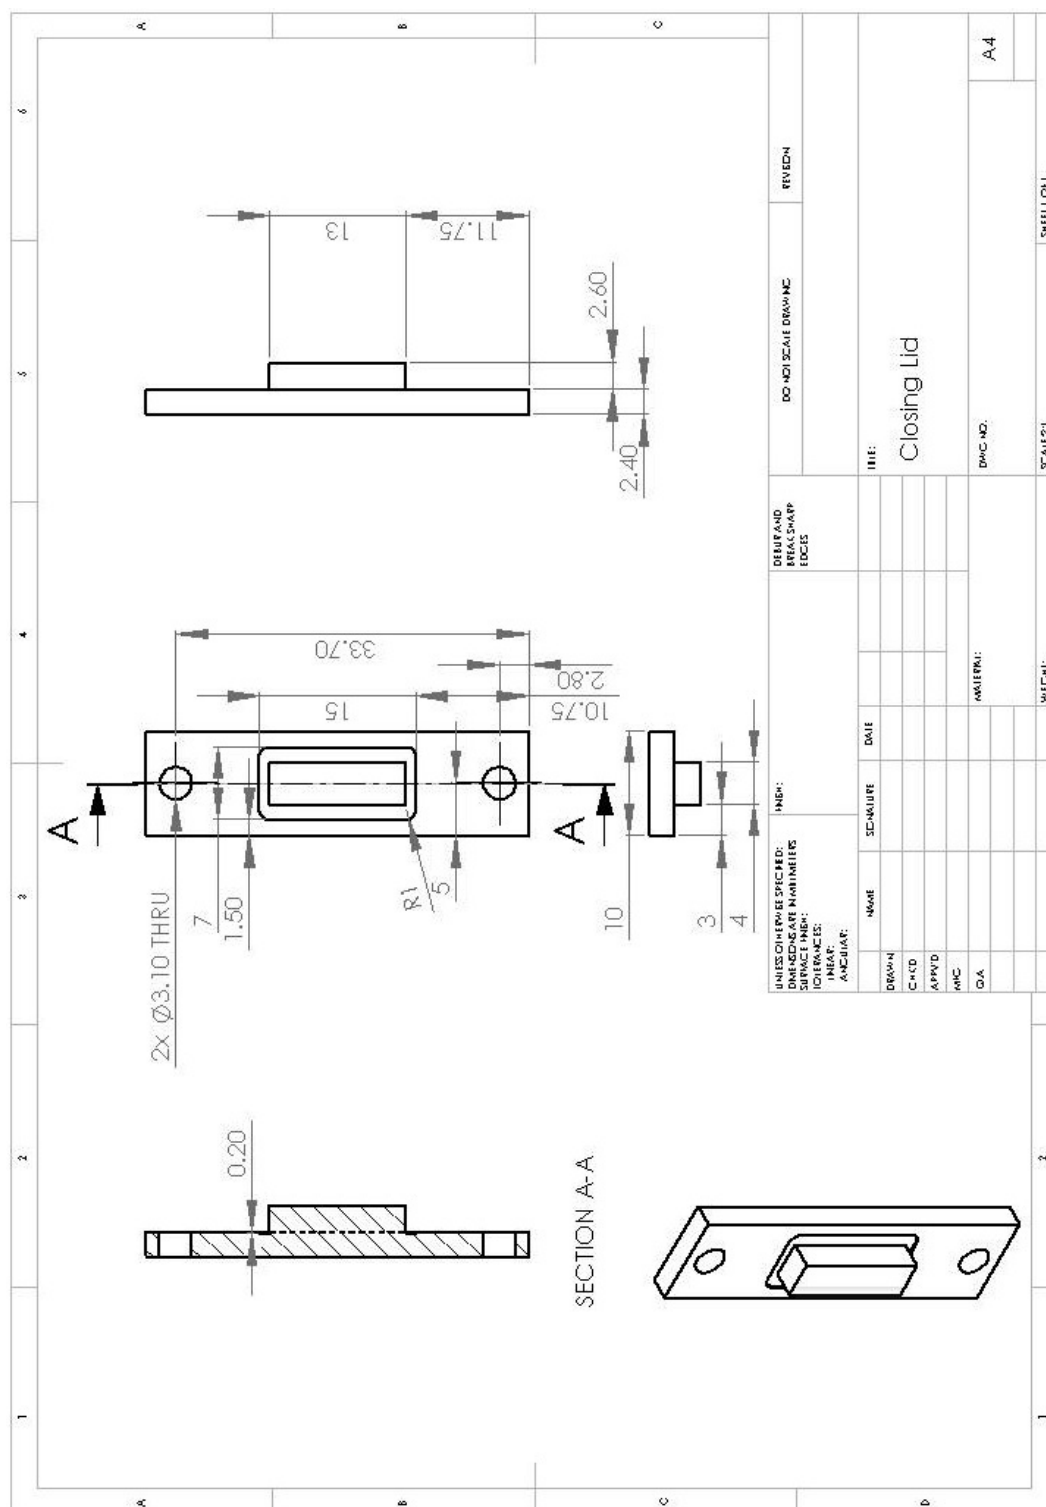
Closing lid for the microfabricated cell culture device used in chapter 3 - Dimensions in mm.
